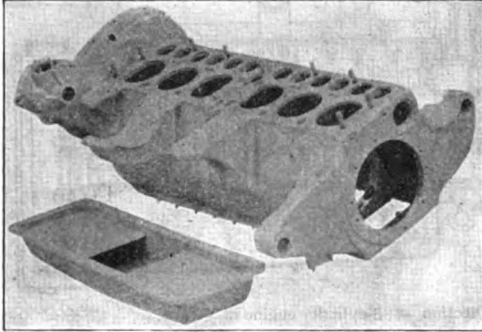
Six-cylinder aluminum crankcase, with oil sump shown separately.
